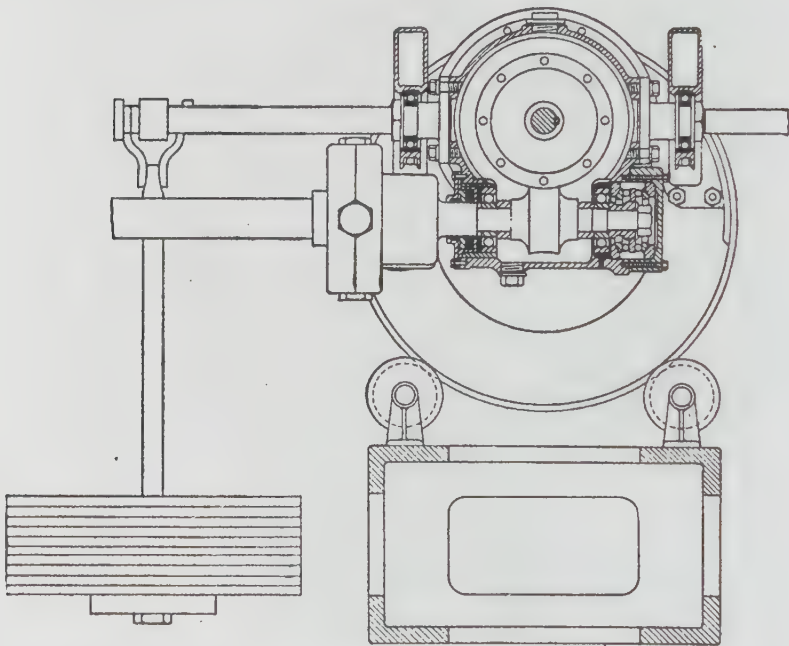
LANCHESTER WORM GEAR TESTING MACHINE.
